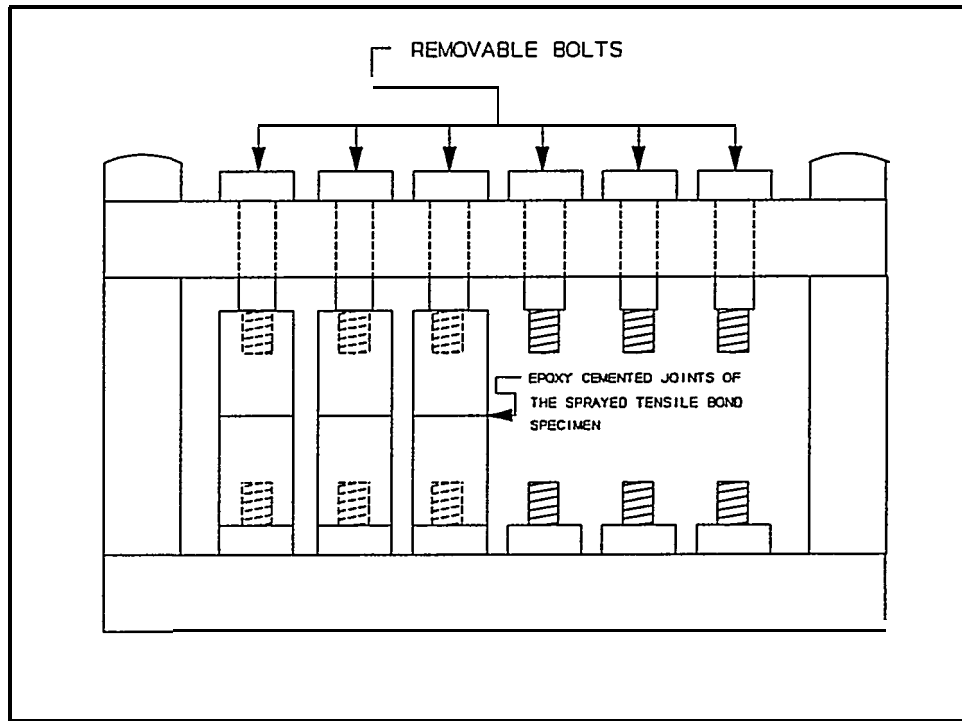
Tensile Bond Specimen Alignment Fixture
